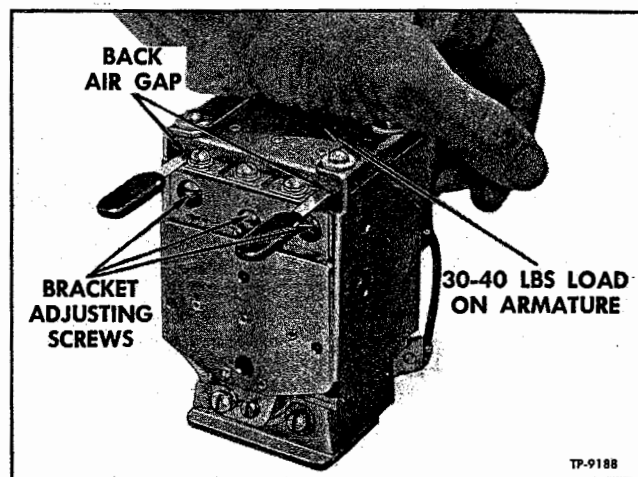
Checking Current Regulator Back Air Gap Adjustment
